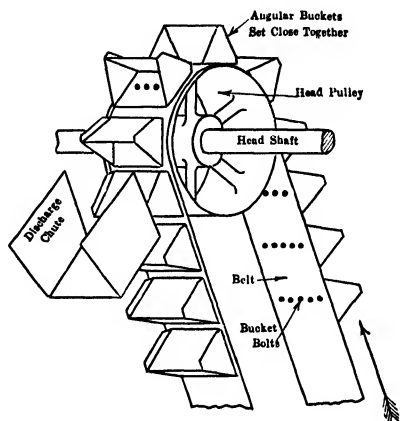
Head of Belt Elevator with Continuous Buckets.
